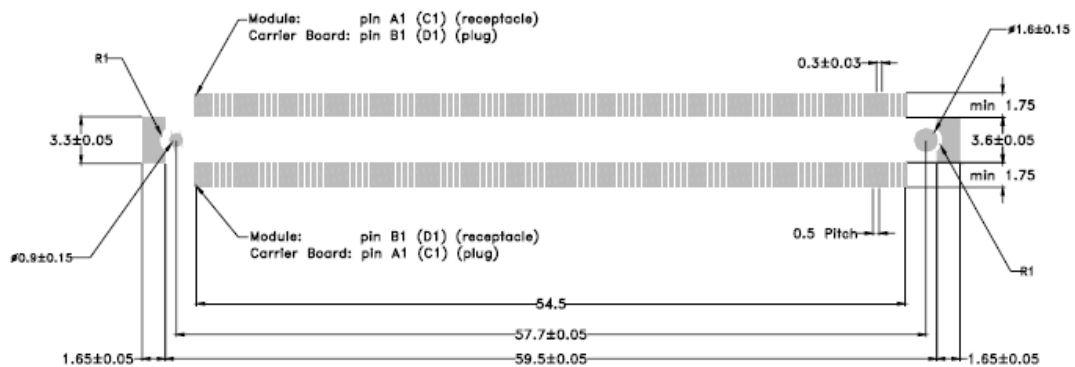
COM-Express Carrier Board Plug (8mm Version)
